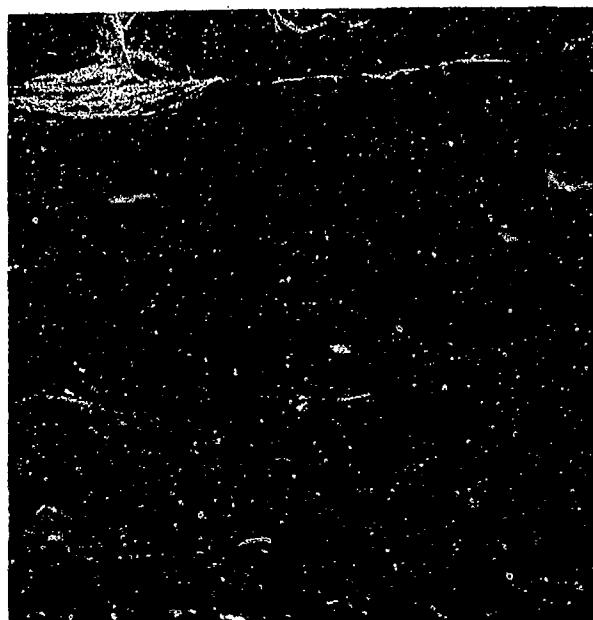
LOP region on tensile fracture surface of AX-110 weldment, 300x.
